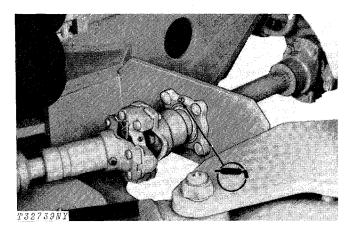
Front Drive Shaft Support Bearing (1 Point)
